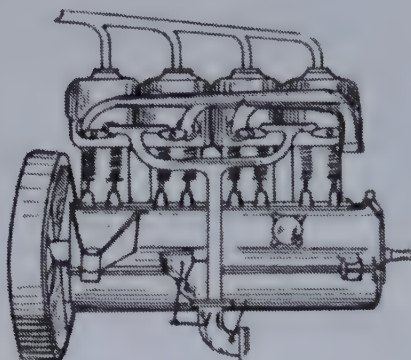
A Four Cylinder, Vertical water cooled Gasoline Engine. Cylinders cast singly. Exhaust and intake valve are all on one side of the engine.
